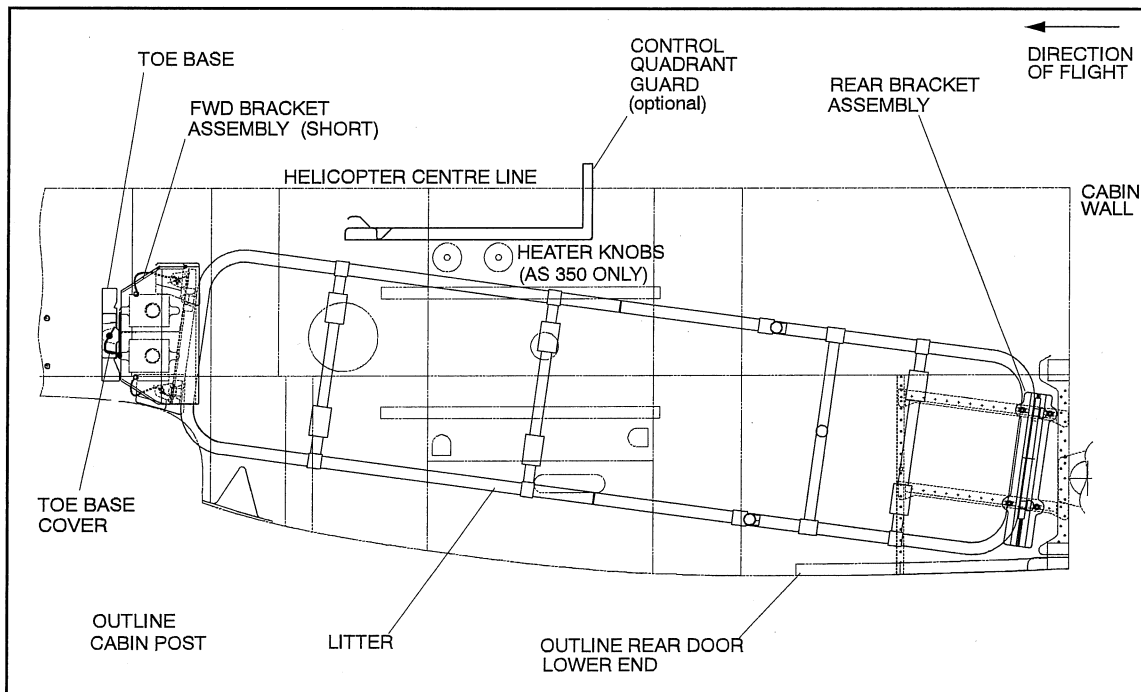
General Layout (Alternate Installation, Short FWD Bracket)
